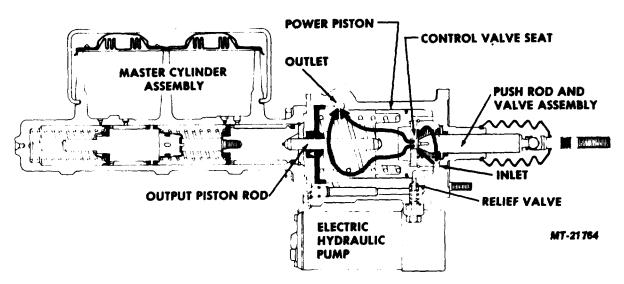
Cross Section View of Hy-Power Booster With a Typical Split Hydraulic System Master Cylinder.
